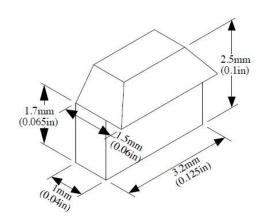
ZCWM05GIV1 PCB Clip Dimensions
